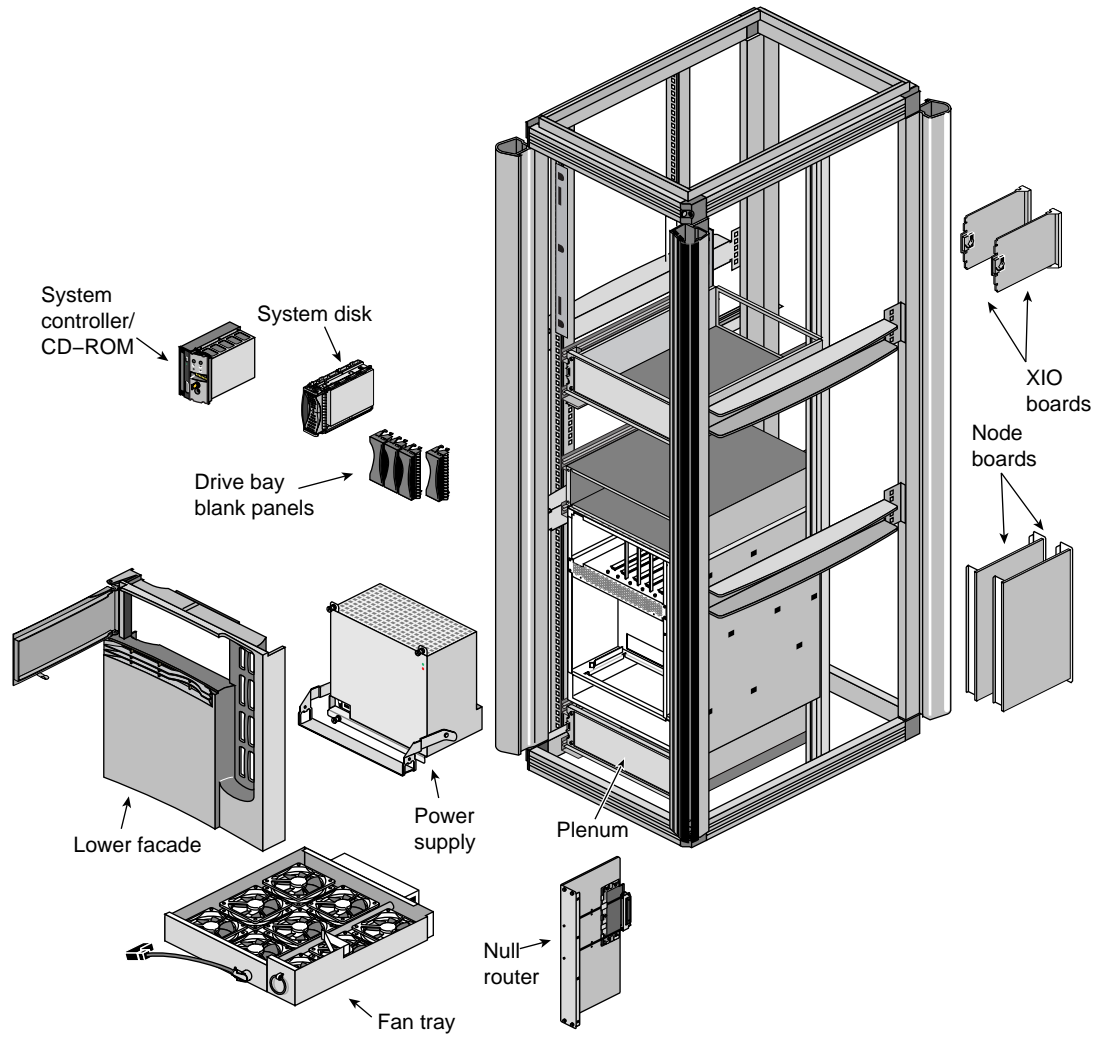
Rackmount Major Components Exploded View (Part II)
